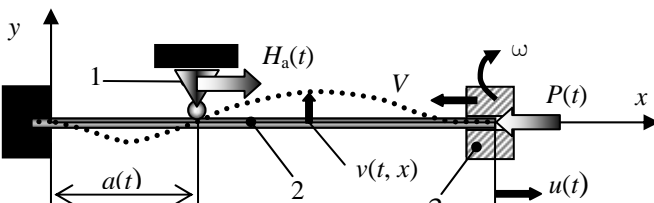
Principal scheme of deep hole drilling with the controlled support (1), (2) – tool, (3) workpiece, V – feed rate, ω - angular speed of workpiece rotation
